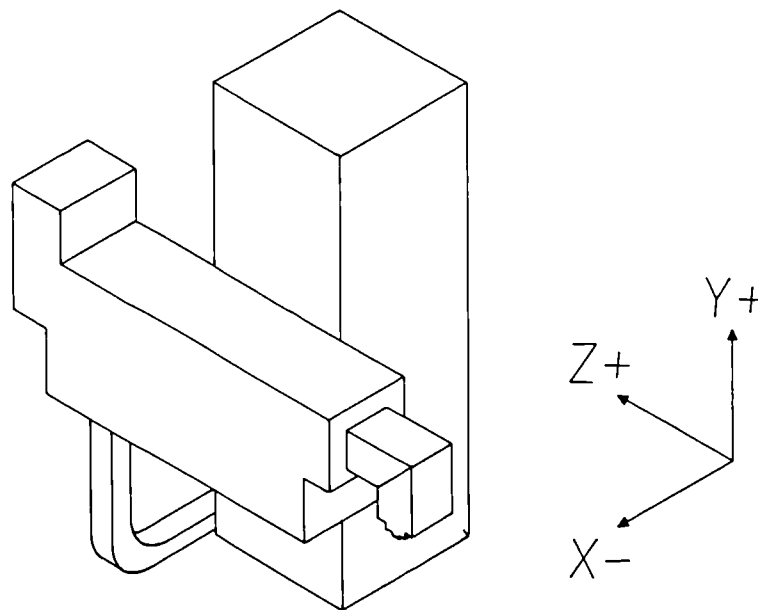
SCHEMATIC DIAGRAM OF A THREE AXIS MACHINE TOOL
